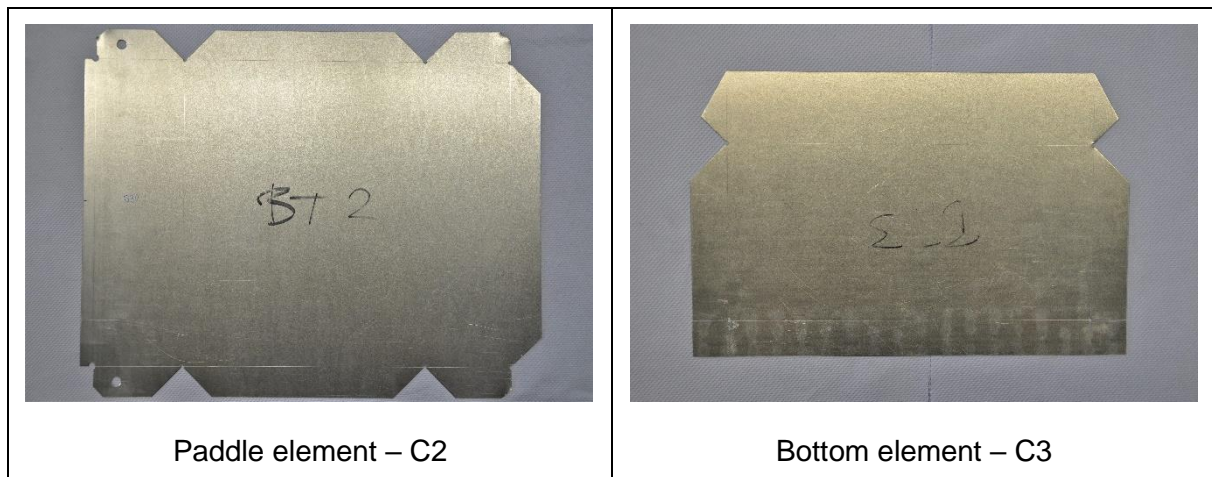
shape of paddle and bottom element after fine cutting and processing the bores
